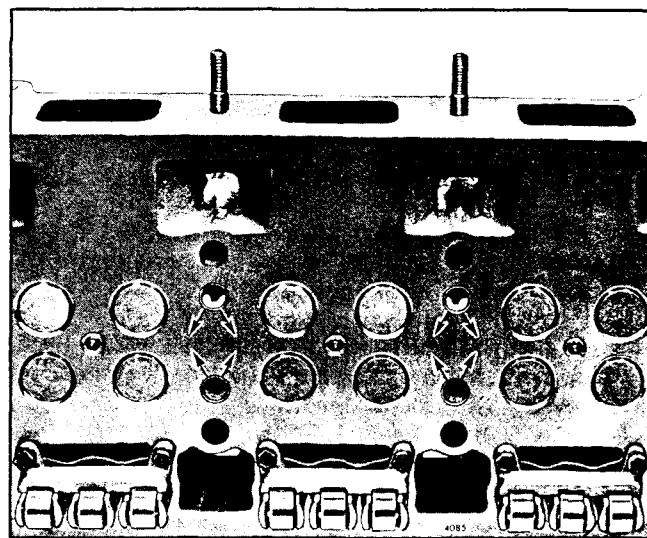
Correct Installation of Water Nozzles in Four-Valve Cylinder Head
